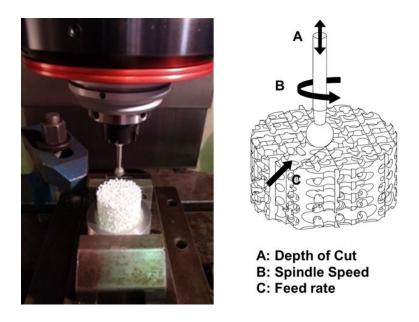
Schematic of the experimental setup and spherical end milling process.
